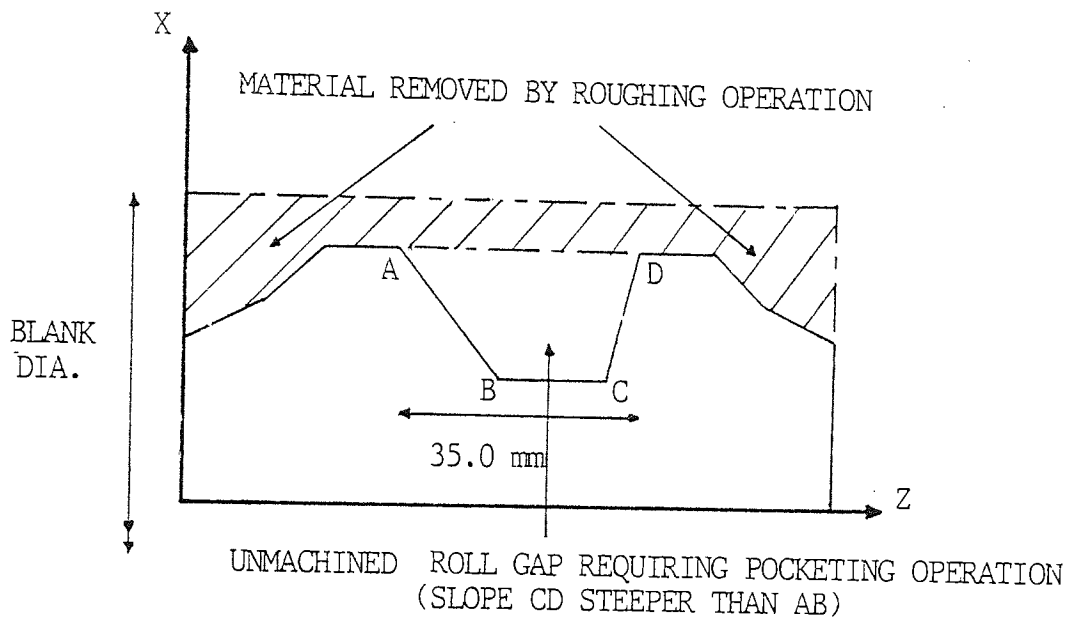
ROLL PROFILE REQUIRING A LEFT HAND POCKETING TOOL
